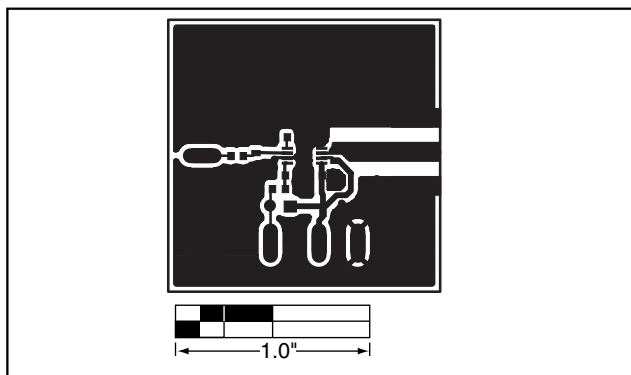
MAX2750/MAX2751/MAX2752 EV Kits PC Board Layout—Component Side
